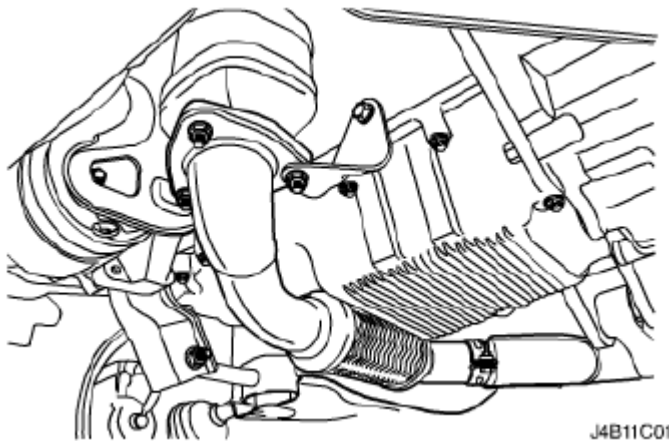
Identifying Catalytic Converter To Connecting Pipe
